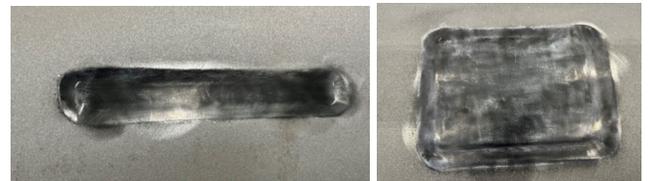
Photographic Examples of Machined Corrosion Features Geometry
